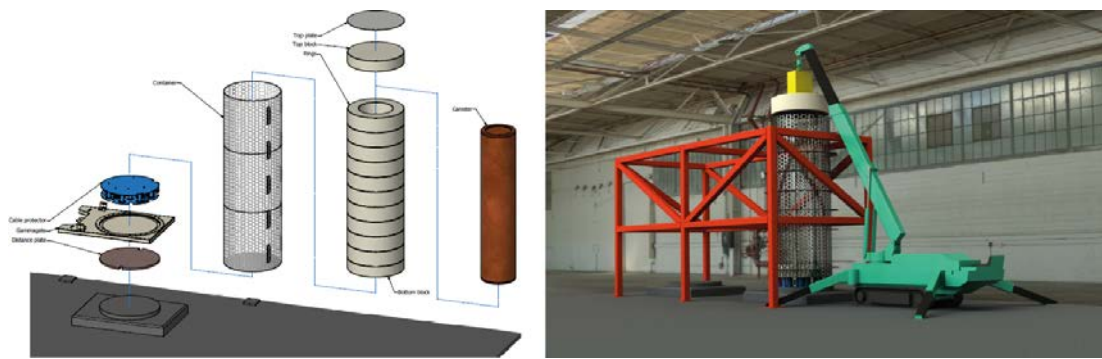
Illustrations of the Supercontainer assembly sequence, the sensors are not illustrated. The Supercontainer will be built on a 'cable block' which has room for the sensor cables and will be connected to the Supercontainer during deposition in the drift.
